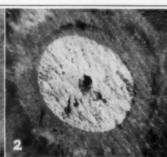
Fracture of weld shown in Fig. 1, after tension test. Magnified 6 diameters. Shows blow hole and burned condition at center.
